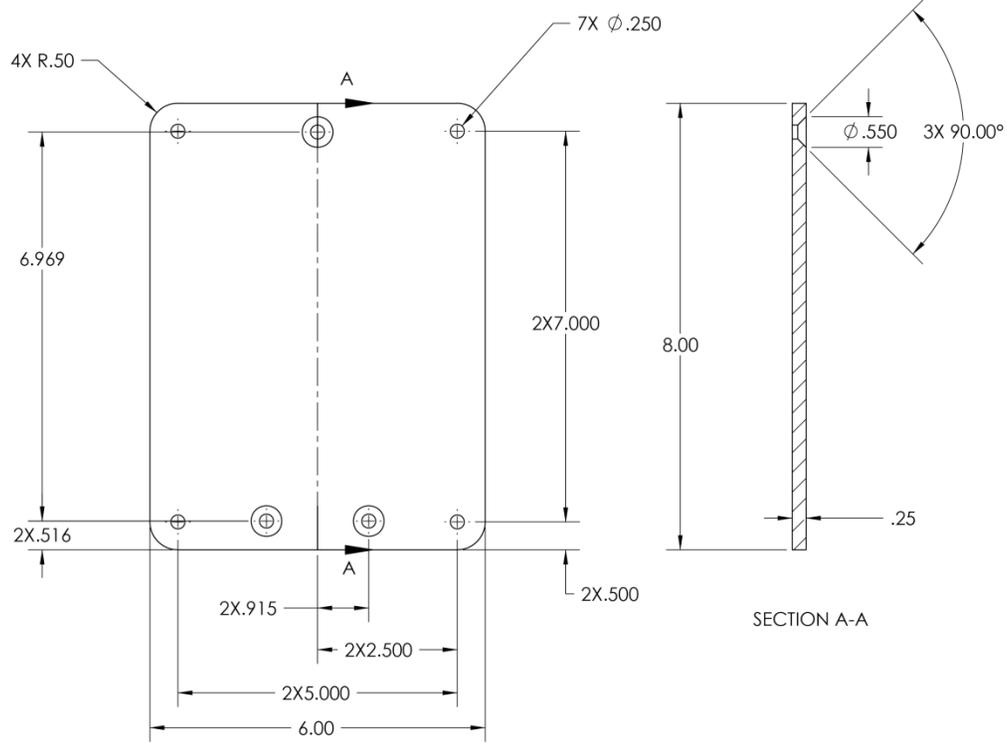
Outline Installation Drawing 96B-6025 Sheet 2
